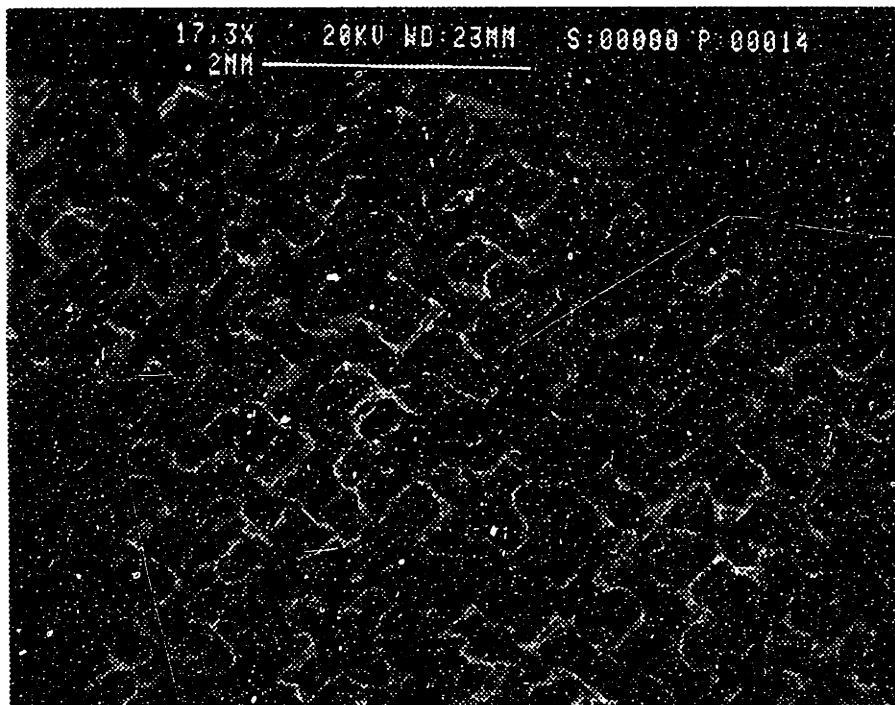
F75 Co-Cr-Mo casting of flat surface texture design #4.
